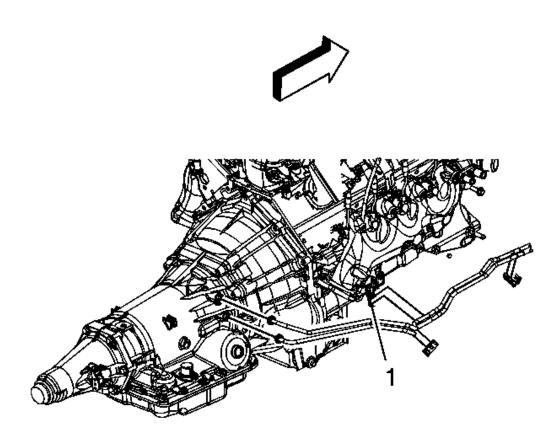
View Of Oil Cooler Line Clip Courtesy of GENERAL MOTORS CORP.
